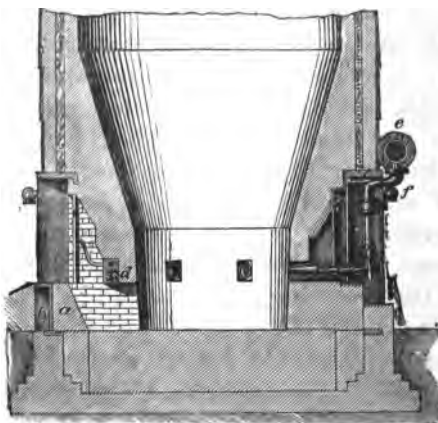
Lower part of blast furnace, section through hearth and dam.
